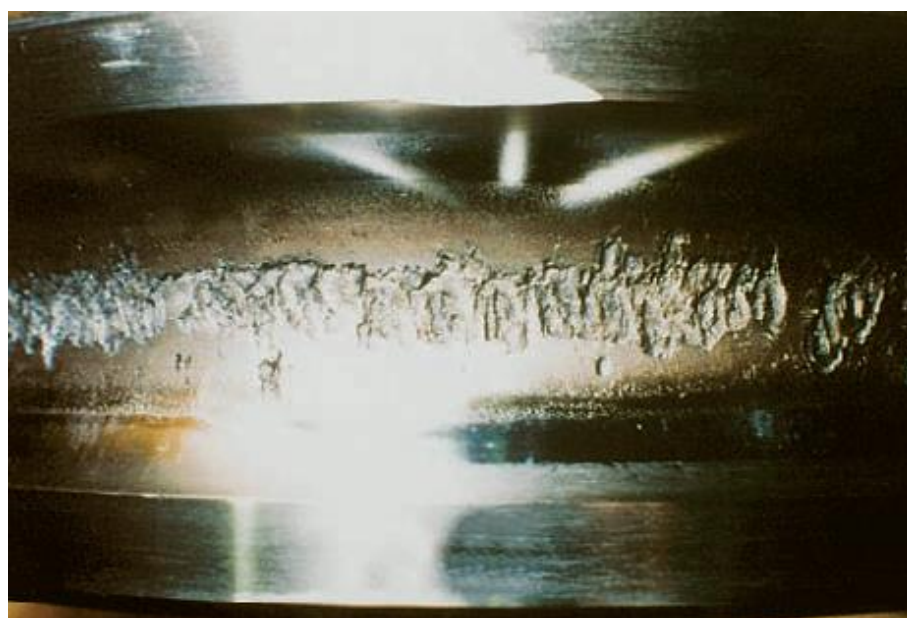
Trace of flaking in the inner raceway of a deep groove ball bearing. <sup>18)</sup>
